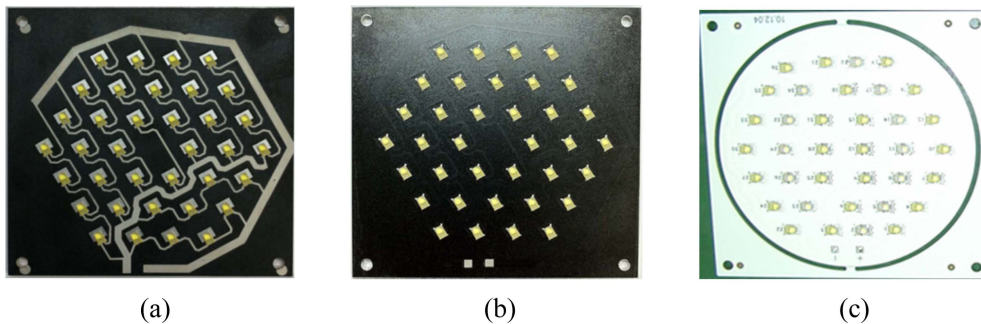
Optical images of fabricated 50 watts rated LED array module panels: circuit layout of 4×9 LEDs arrayed on ceramic-metal hybrid PCB panel (a) without top protection layer, (b) with top protection layer, and (c) comparative LED array module made with thermal-via FR-4 PCB.
